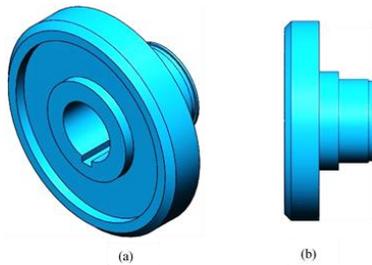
(a) Isometric View of Rotor (b) Side View of Rotor
